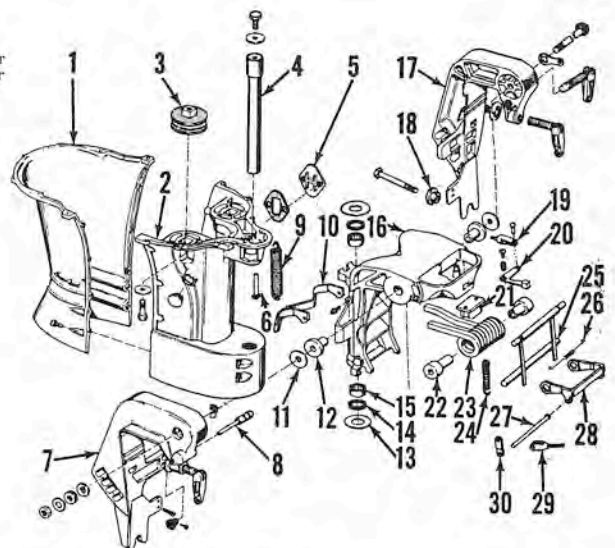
Exploded view of stern bracket, swivel bracket, exhaust housing and associated parts used on 75 hp models.
